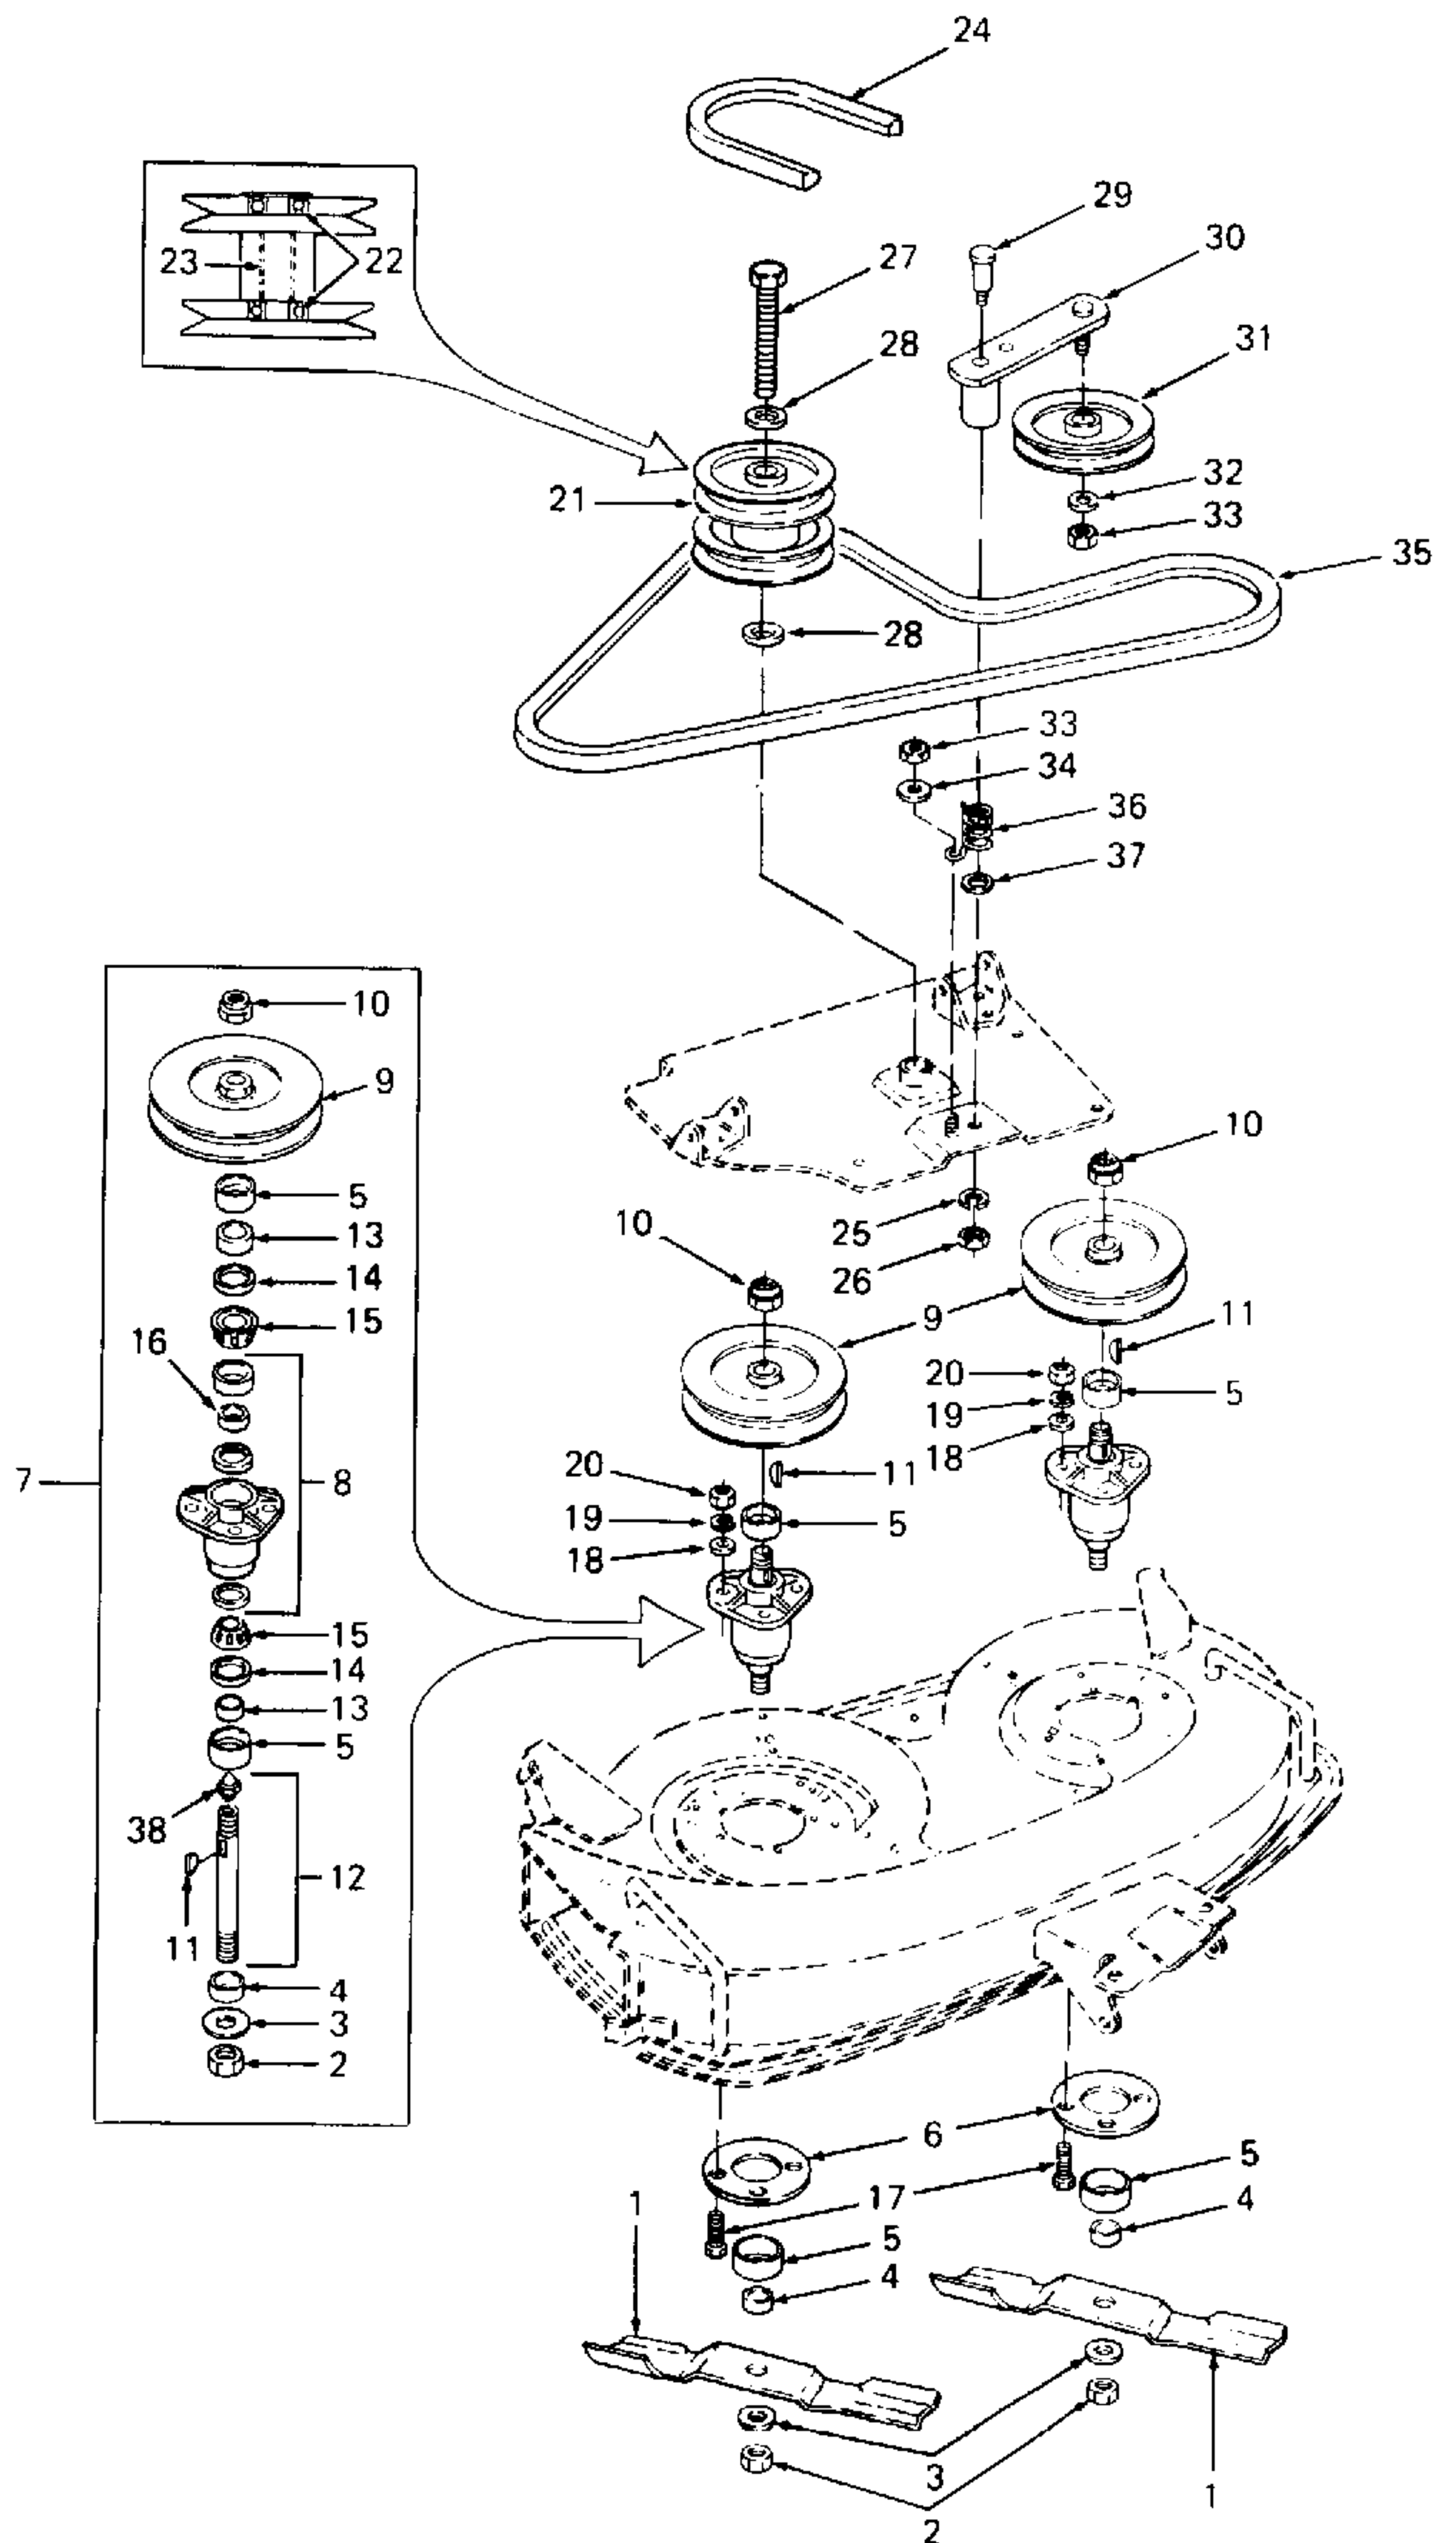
Spindles, Pulleys and Blades (Model 190-328).
